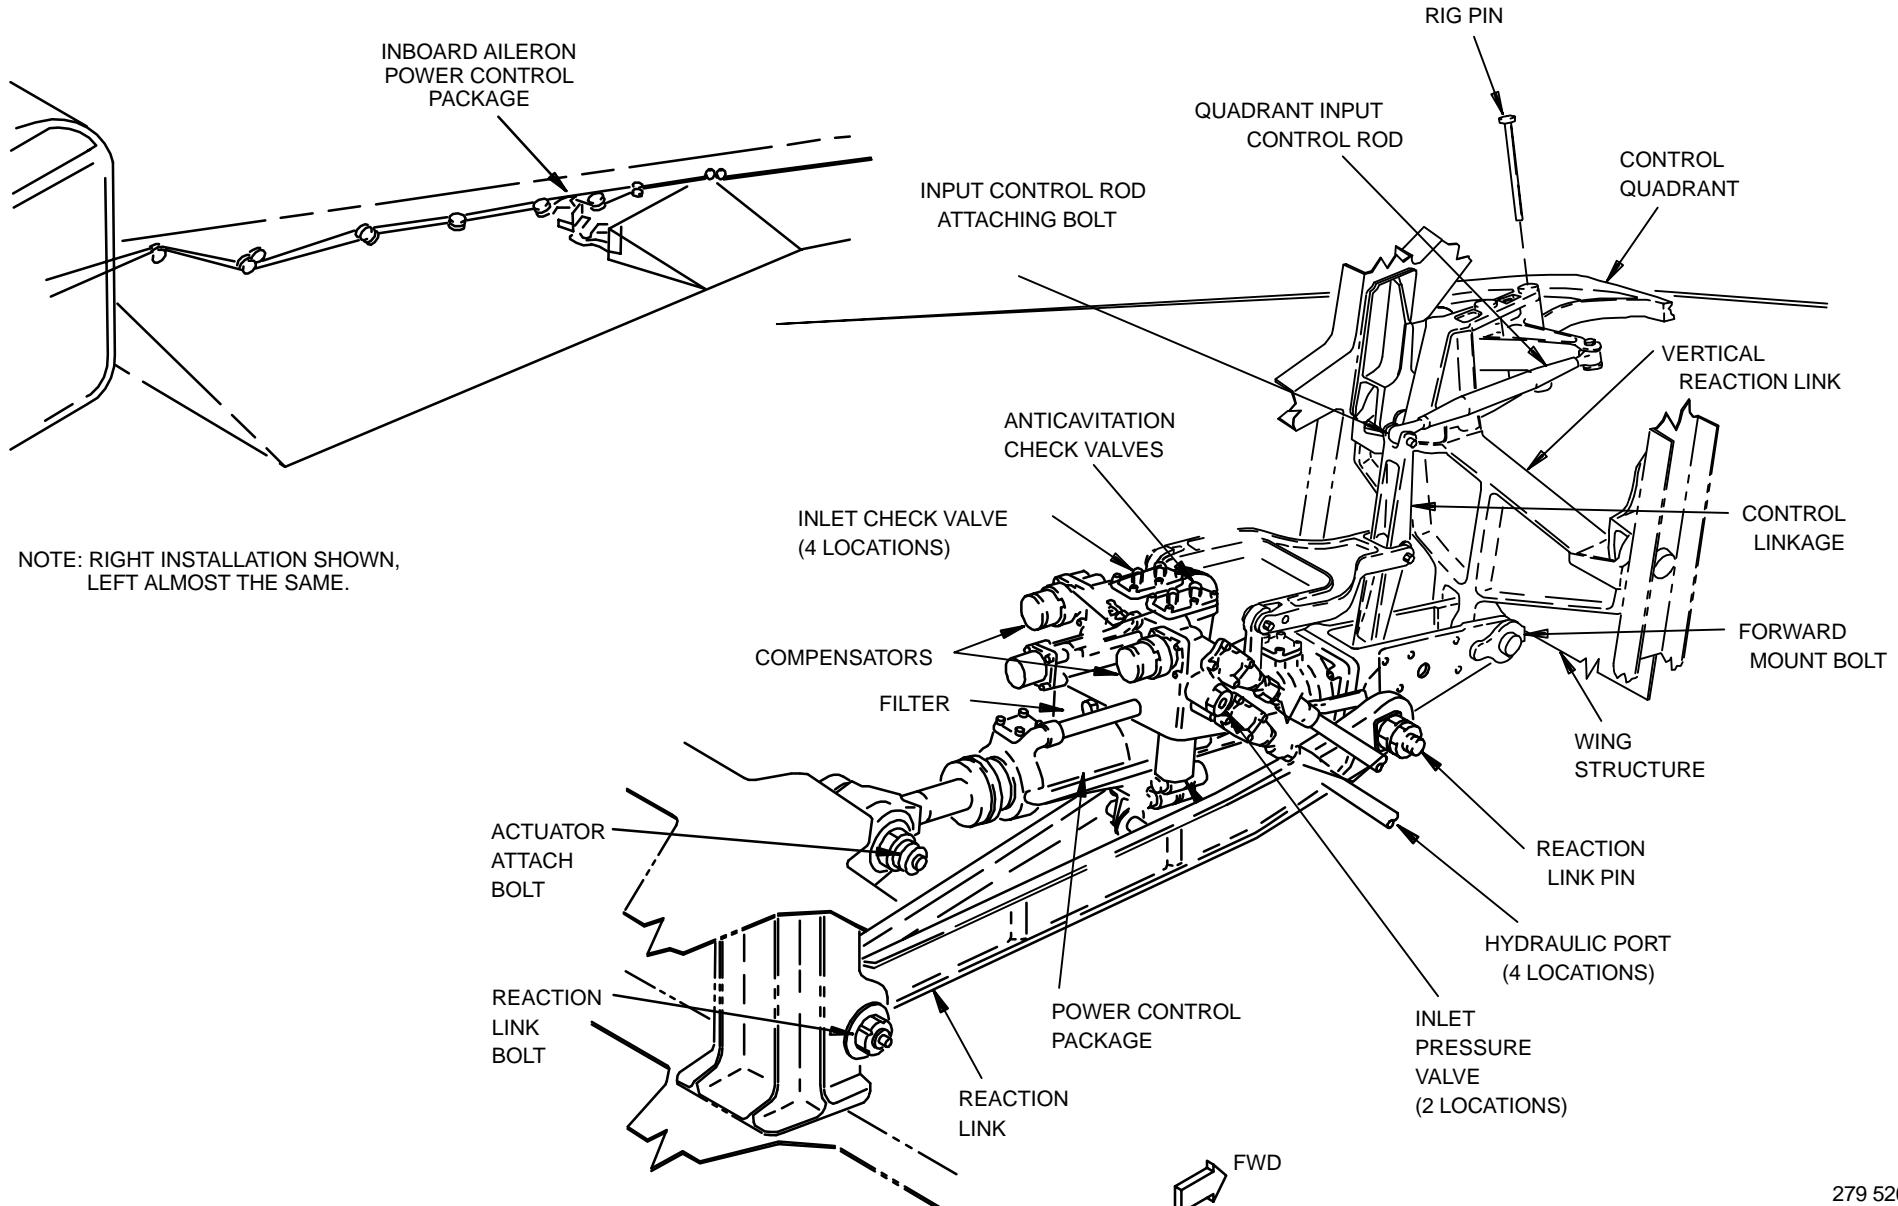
INBOARD AILERON POWER CONTROL PACKAGE
